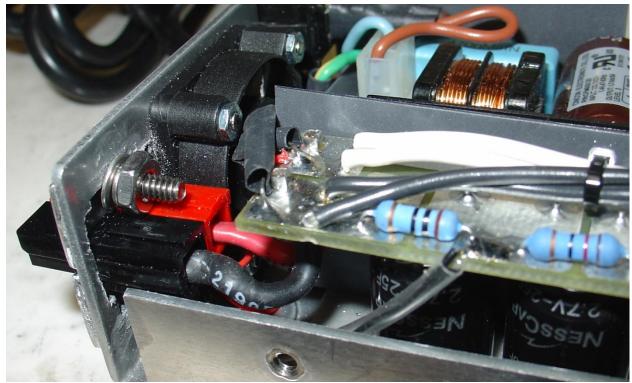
PowerPole assembly is installed. Note the flat-washer that ensures sufficient mounting area.
